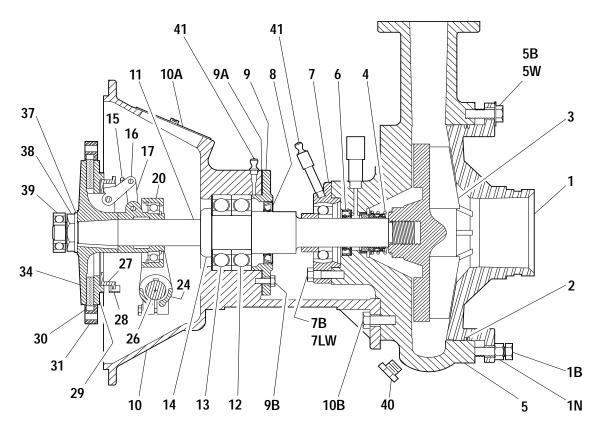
Cross-Section Through Clutch/Pump Assembly (Clump)
